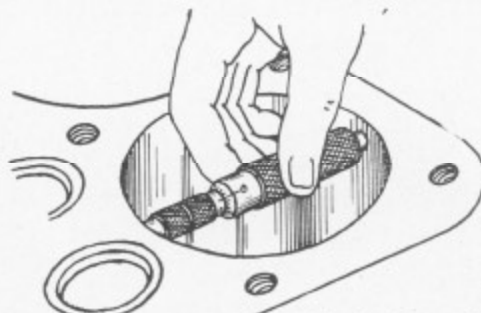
Measuring Finished Cylinder Bore with Inside Micrometer
